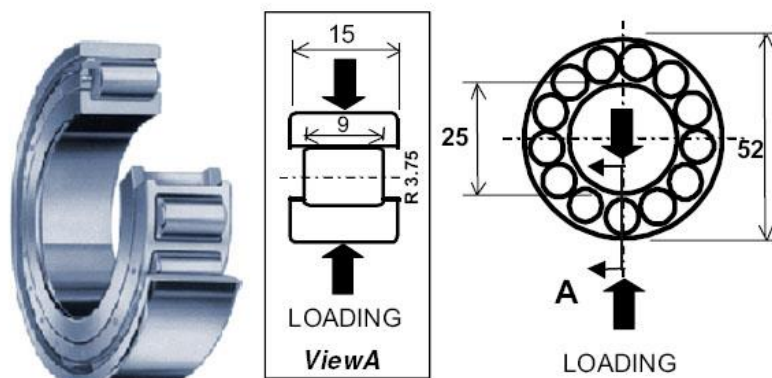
Geometry of the rolling bearing used in the tests. (a) Three-dimensional overview and (b) details of dimensions.
